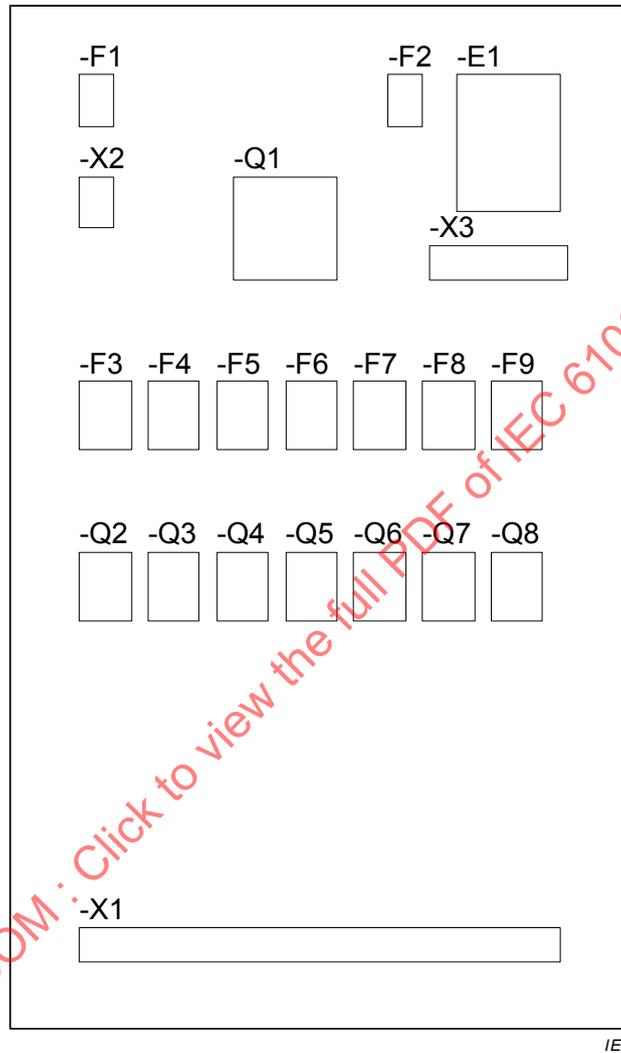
An arrangement drawing the mounting panel of a cubicle
